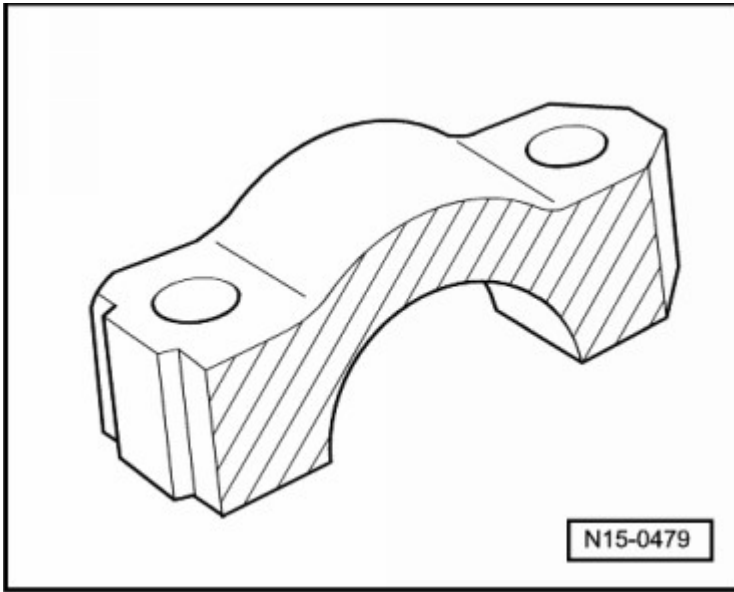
Coating Bearing Caps 7 And 8 Contact Surface With Adhesive Lubricating Paste
